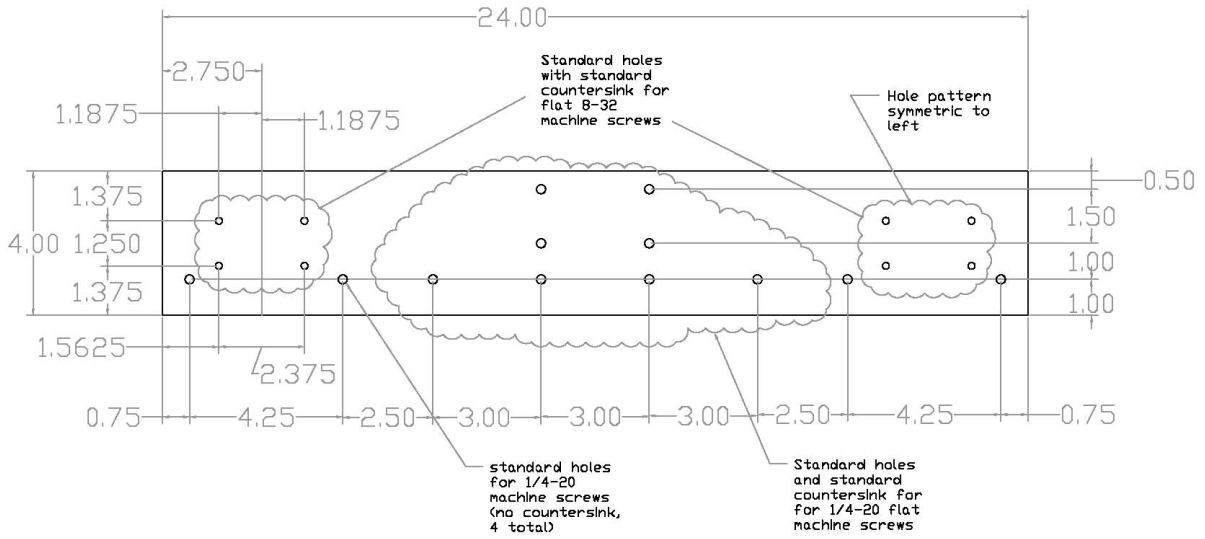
Plate which rides on the bearings and attaches to the 3x3 angle.
